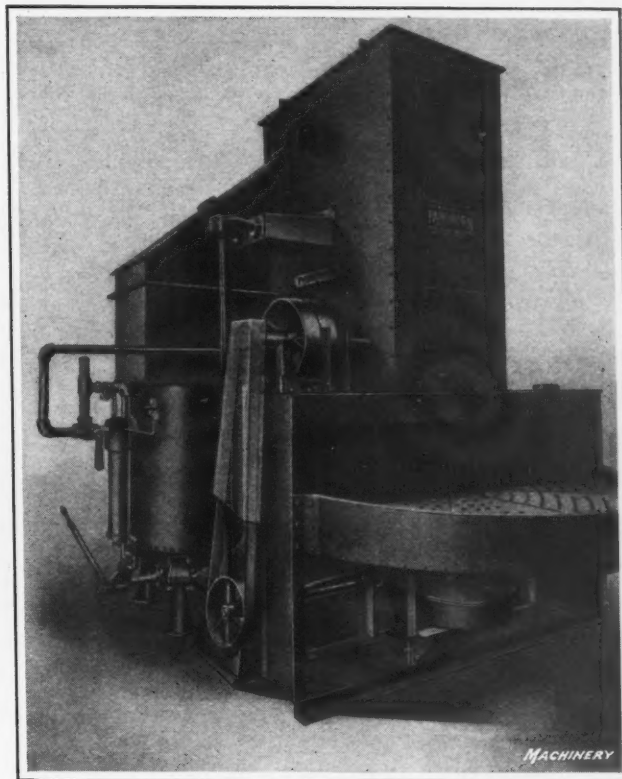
Automatic Rotary-table Sand-blasting Machine with Direct-pressure Blast
